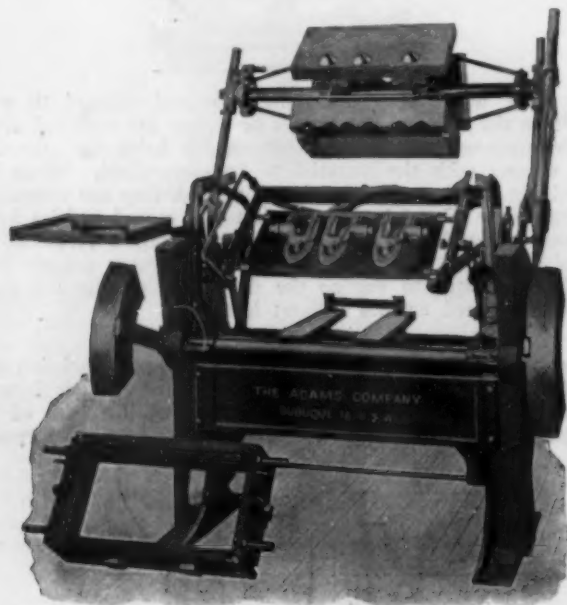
MOLDING MACHINE ADAPTED FOR CONTINUOUS WORK, USING STANDARD PATTERNS THE YEAR ROUND.
